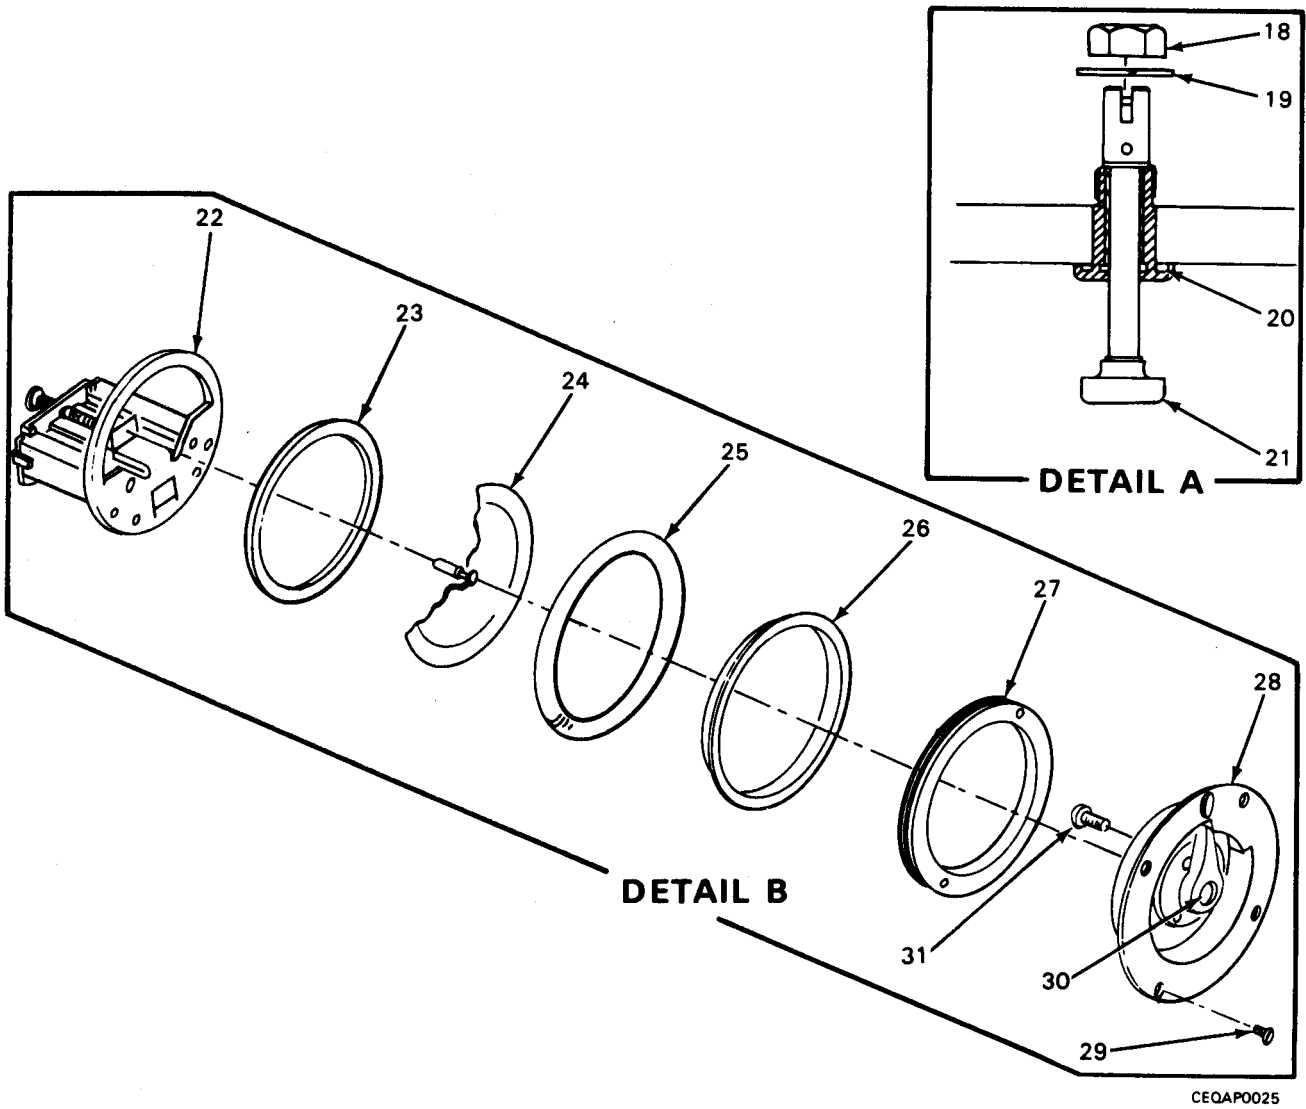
Panel Assembly (AN/GRA-39A, B, and C) (Sheet 2 of 2)
